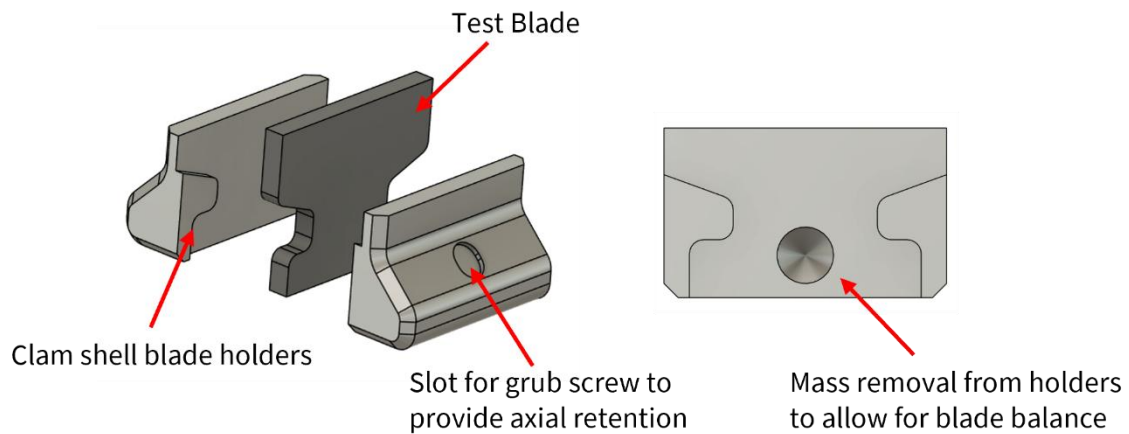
Schematic of blade holder design with detail on mass removal
